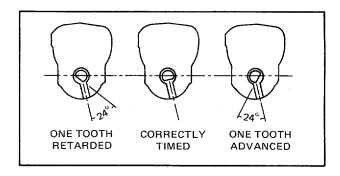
Injector Rack-to-Gear Timing INJECTOR SPRAY TIPS
